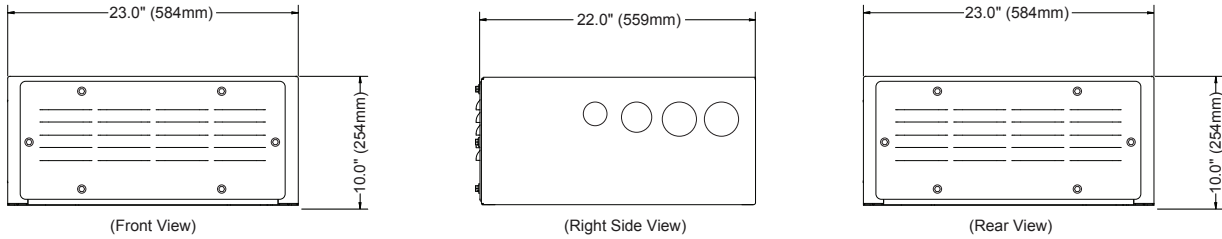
, FBE2322-P10 10" Pedestal Exterior Dimensions
